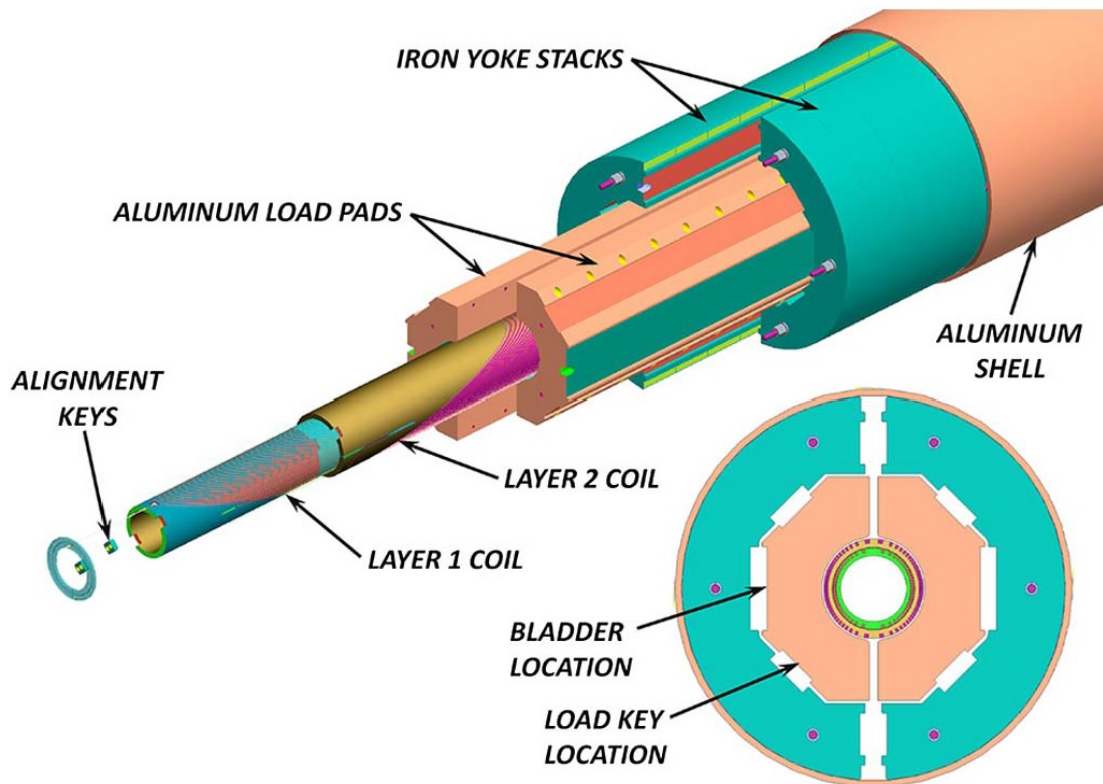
An exploded view of CCT1 with an external key, bladder, and shell loading structure is shown.
